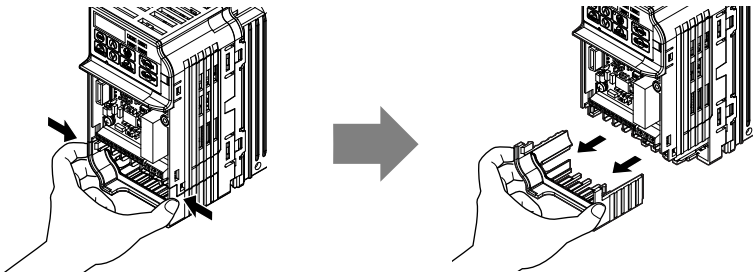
Remove the Terminal Cover on an IP20/Open-Chassis Drive
